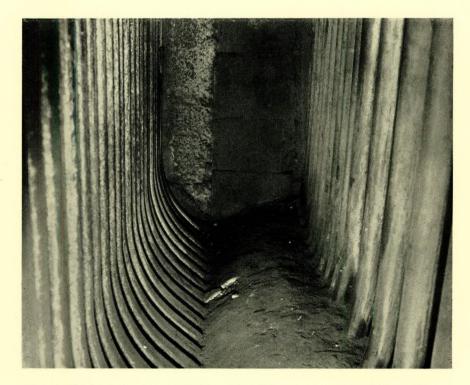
Main boiler in s.s. Nestor: view between generating tube bank and starboard superheater support tubes (water drum)
